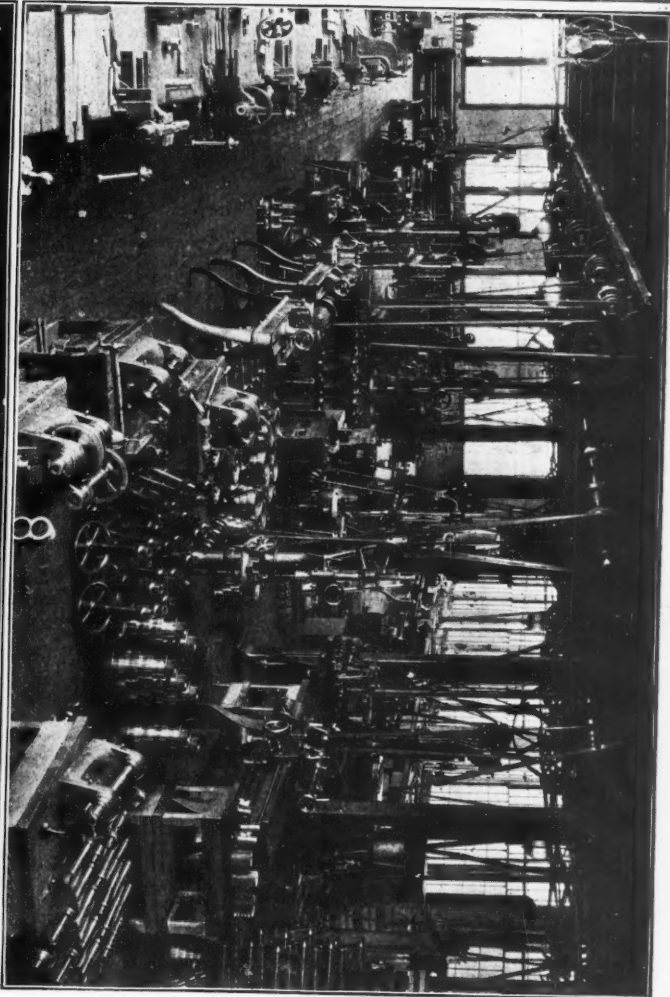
JIG DRILLING AND LATHE PARTS ASSEMBLING DEPARTMENT.
